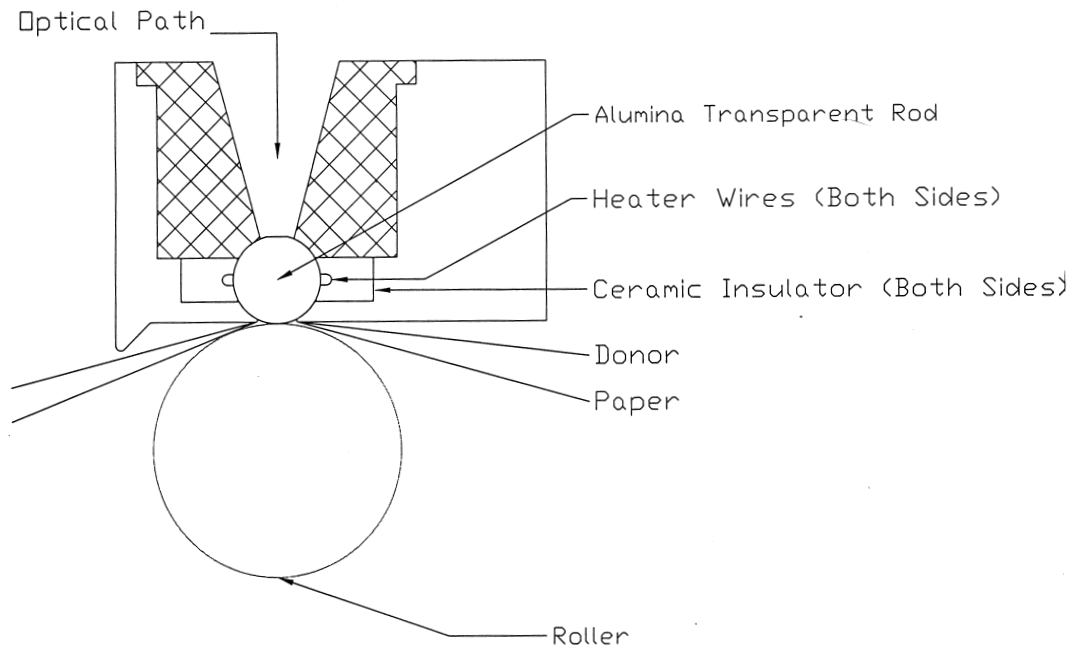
Cross-section of the assembly containing the transparent alumina rod, heater wires, and the optical path.
